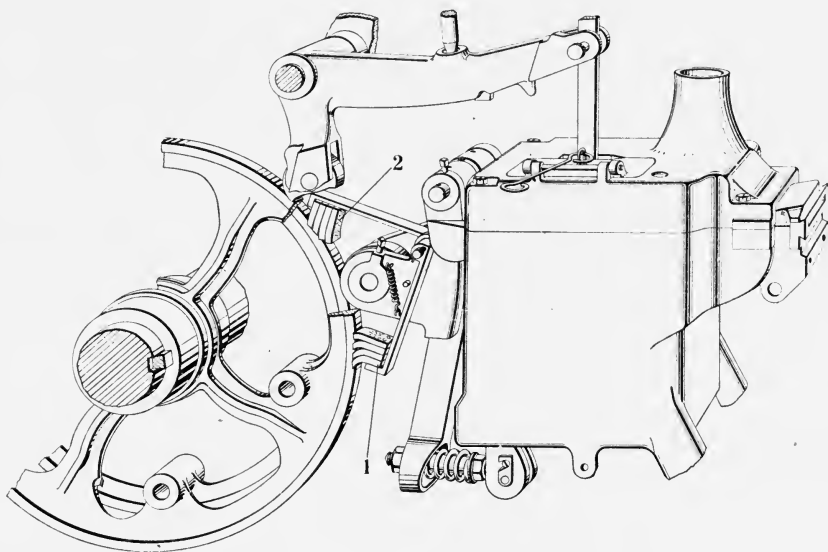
Cam Wipers. These two cam wipers are held by brackets fastened to the pot lever. The pot pump cam wiper is indicated at 1 and the pot cam wiper at 2. These wipers keep the faces of the two cams clean.
